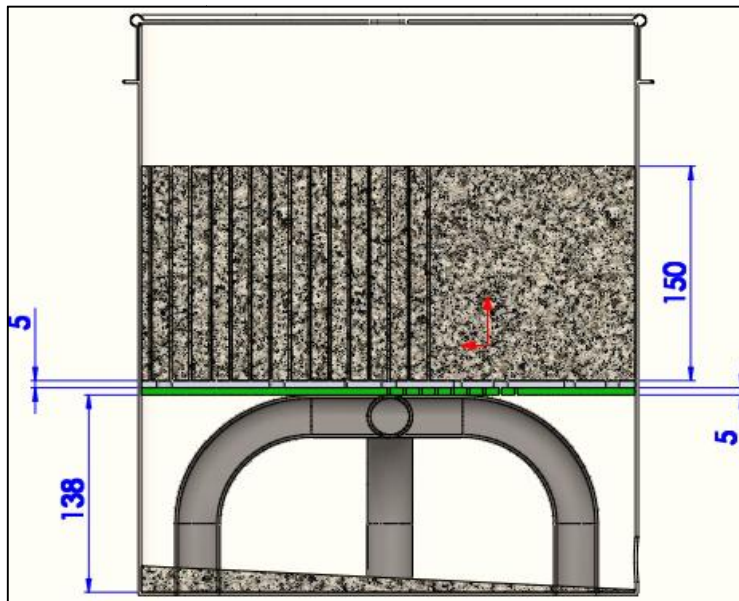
Mechanical filter tank design showing the different layers with adopted dimensions
